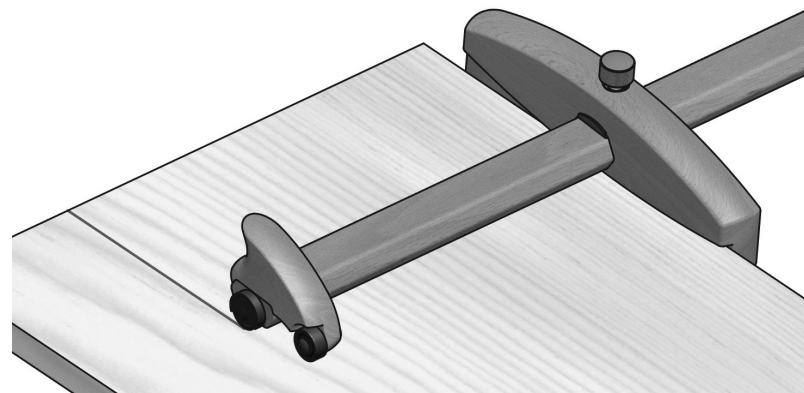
Holding the fence securely against the reference edge of the workpiece.
